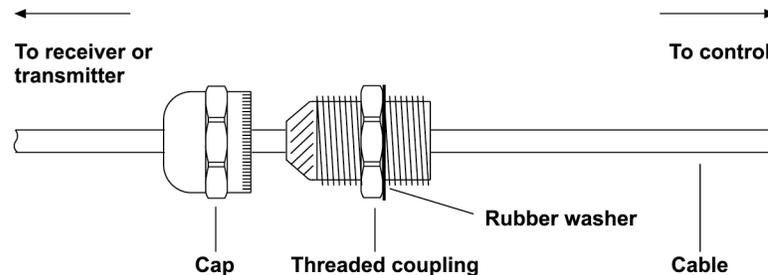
Cable Being Threaded through Top of Gland Nut and Threaded Coupling
